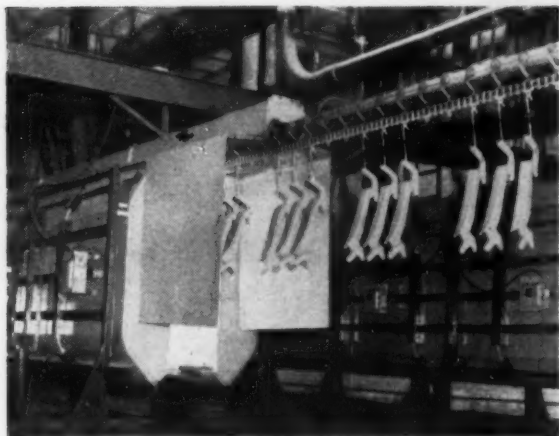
Priming coat is baked on trip through first of two infra-red baking ovens. Parts are heated to 275° to 300°F.
